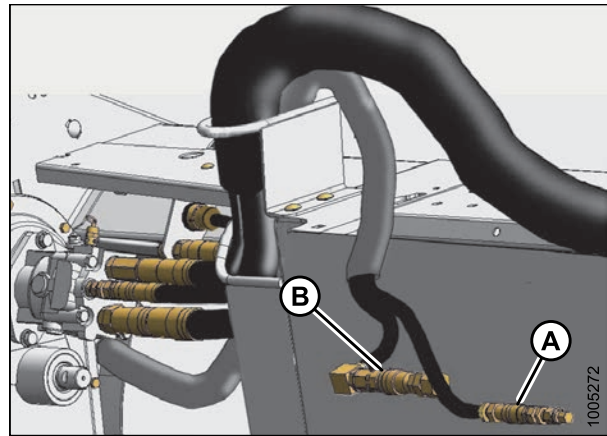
Auger Pressure and Auger/Reel Return Hose Couplers – 14-Ft. and 16-Ft. Header Shown (18-Ft. Similar)
